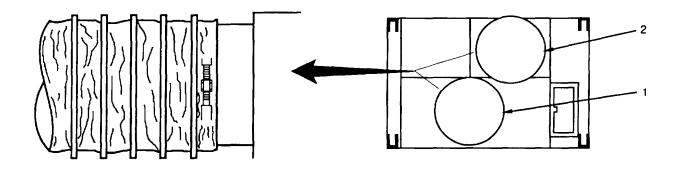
Flexible Duct Attachment to Duct Adapter Flange
